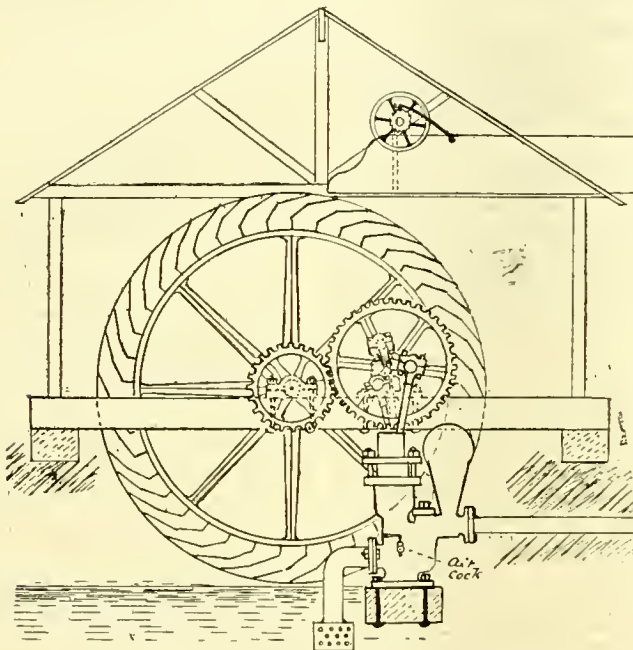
WATERWHEEL FOR PUMPING PURPOSES.
